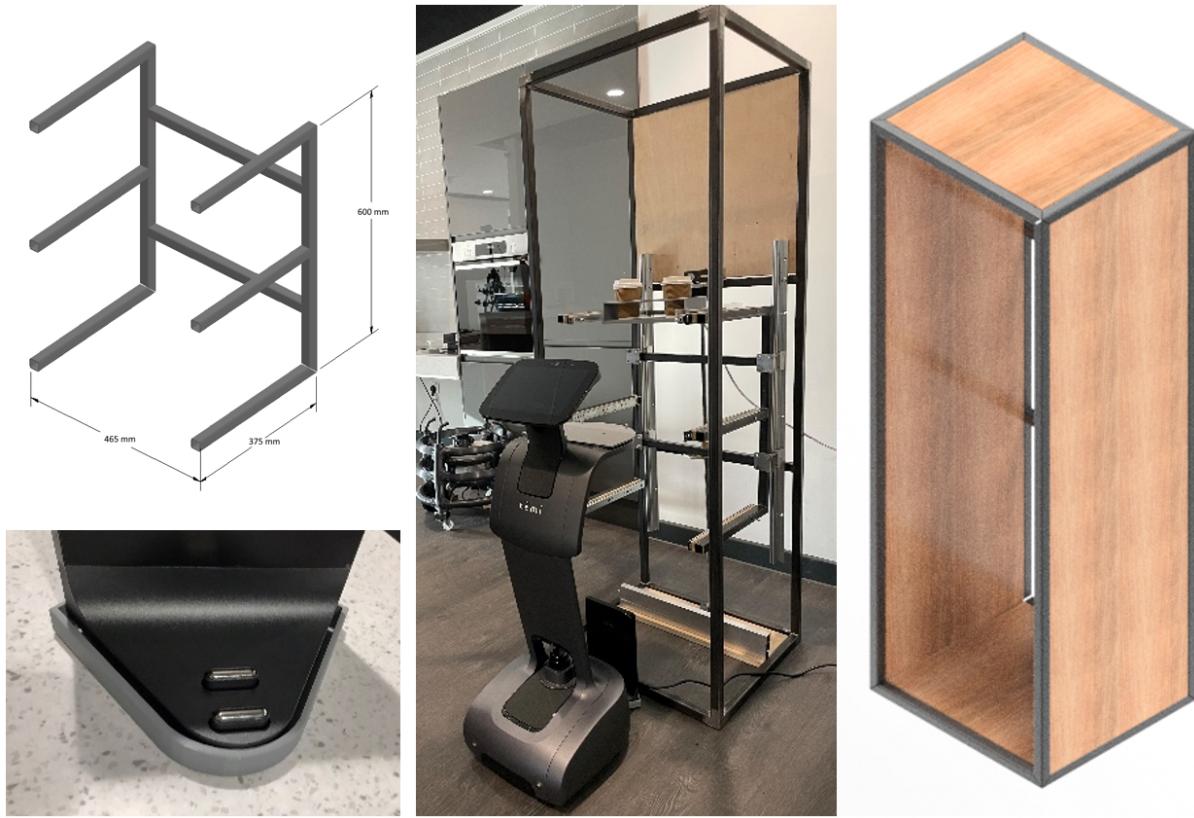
Cabinet:(left top) Rack design; (left lower) Charger positioning bracket; (center) Témi parked at furniture.; (right) Frame design.
